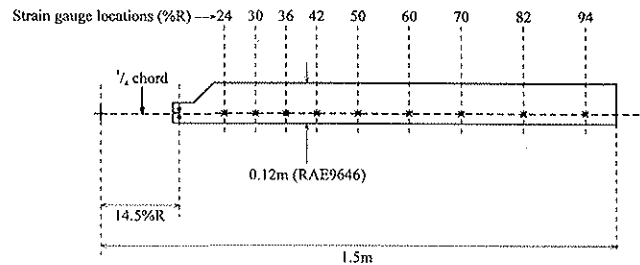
Geometry of the 1a rotor blade showing strain gauge locations
